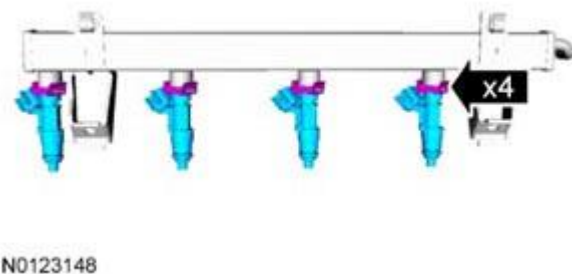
Identifying Fuel Injector Clips And Fuel Injectors
